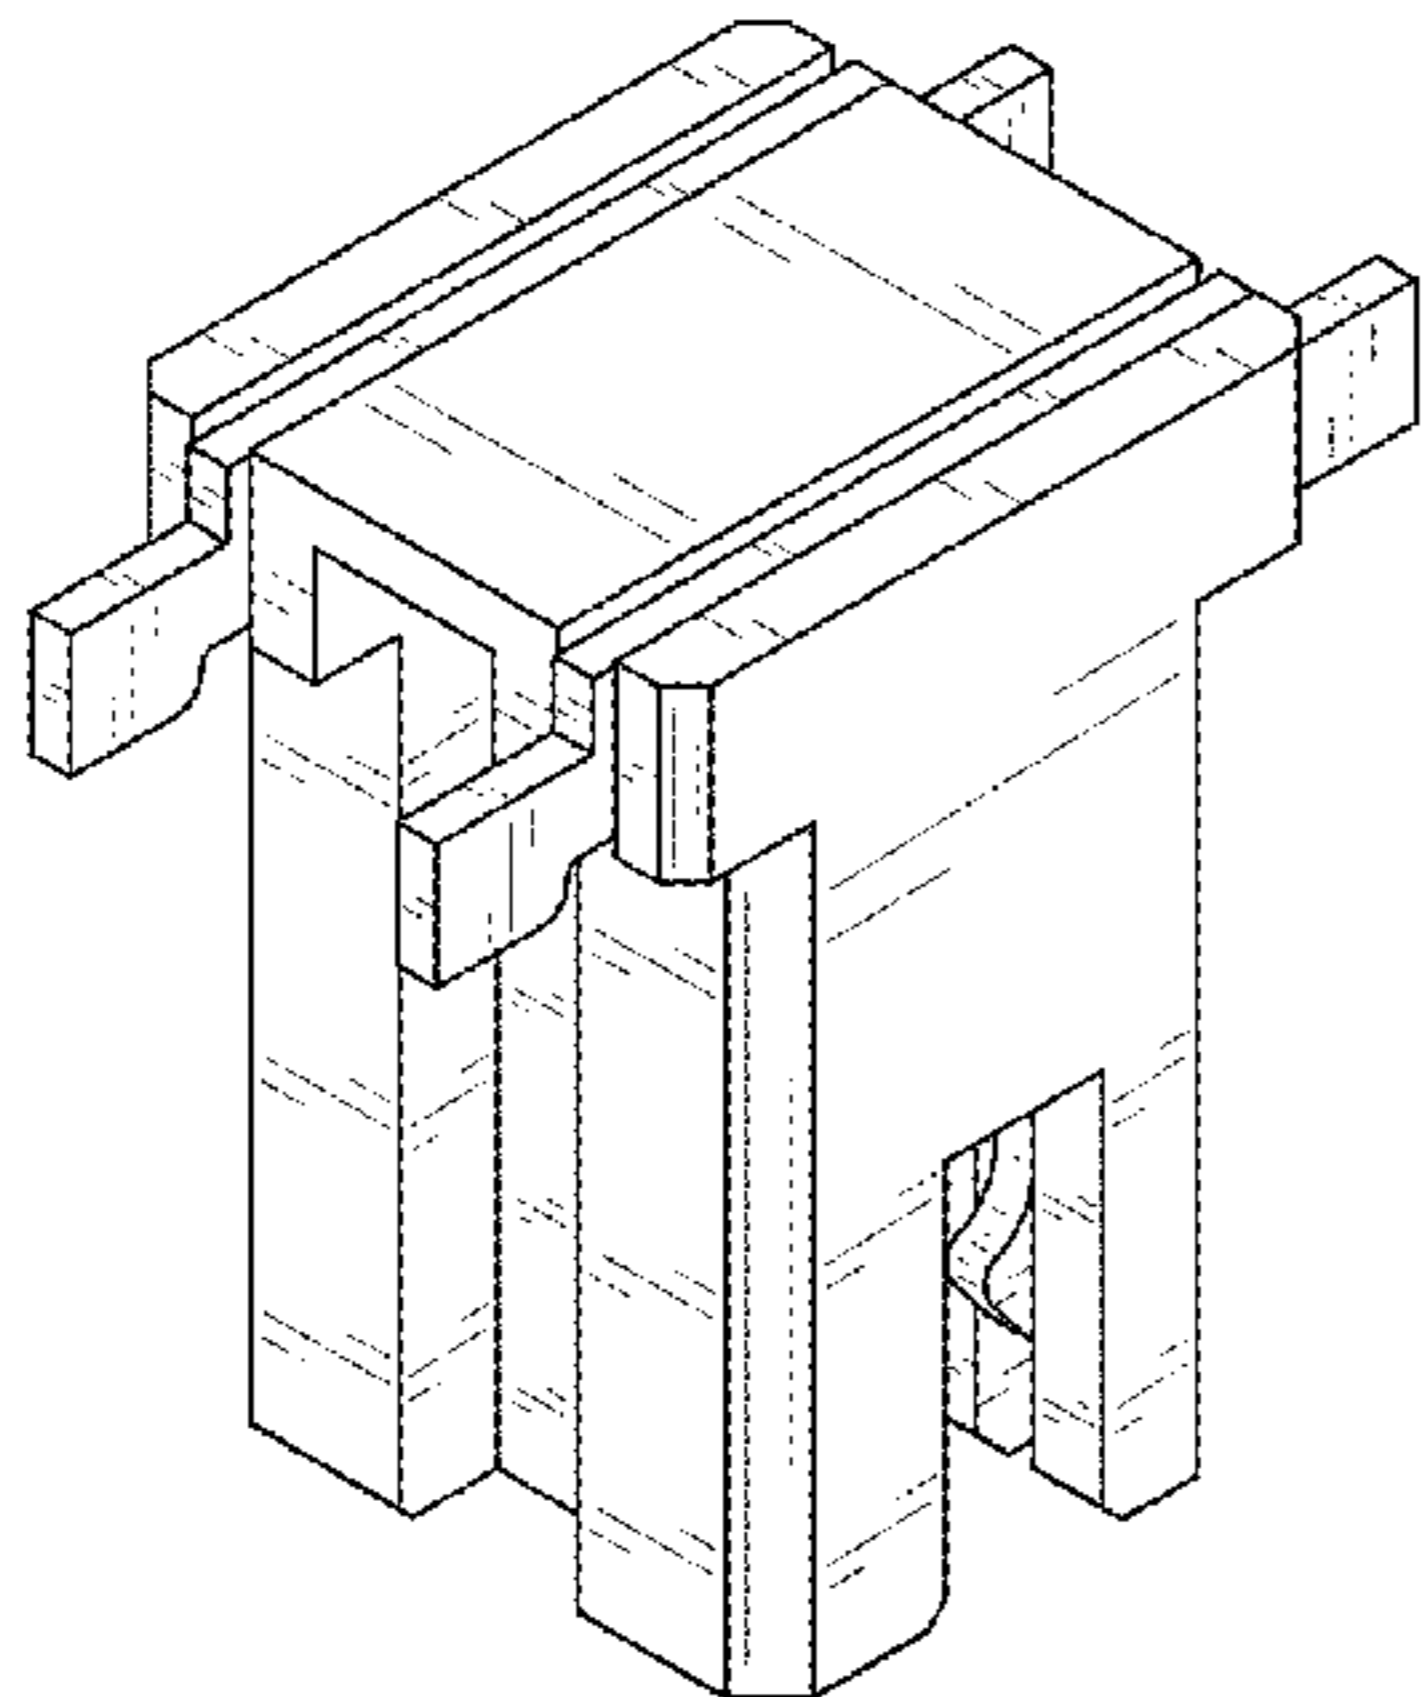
is a perspective view showing a rear, bottom and left side thereof;
